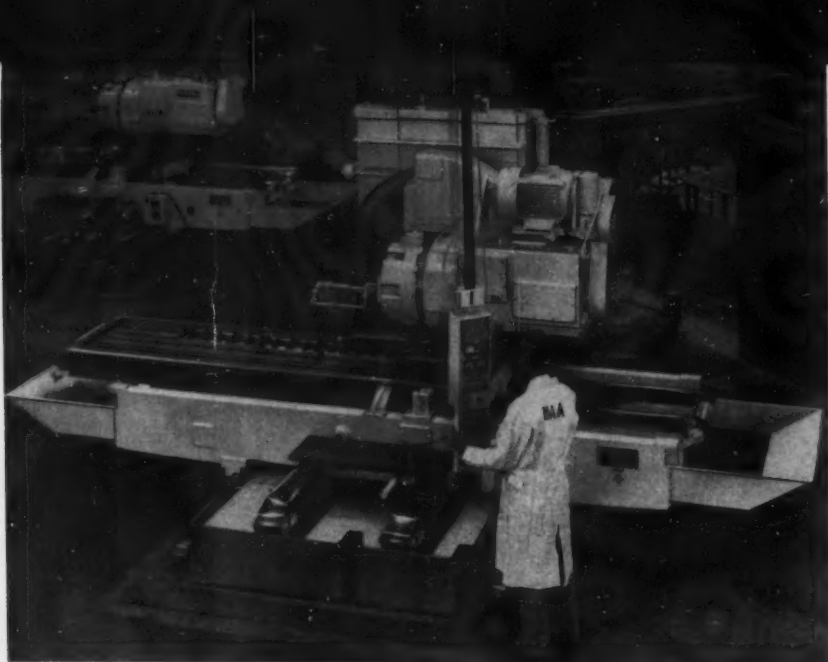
One of several Omni-mil milling machines which provides maximum versatility through low- and high-speed spindles that can be placed in any angular position.
